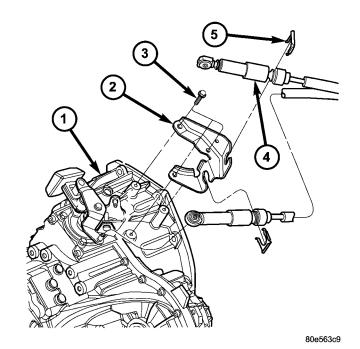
Gear Shift Cables and Bracket at Transaxle
